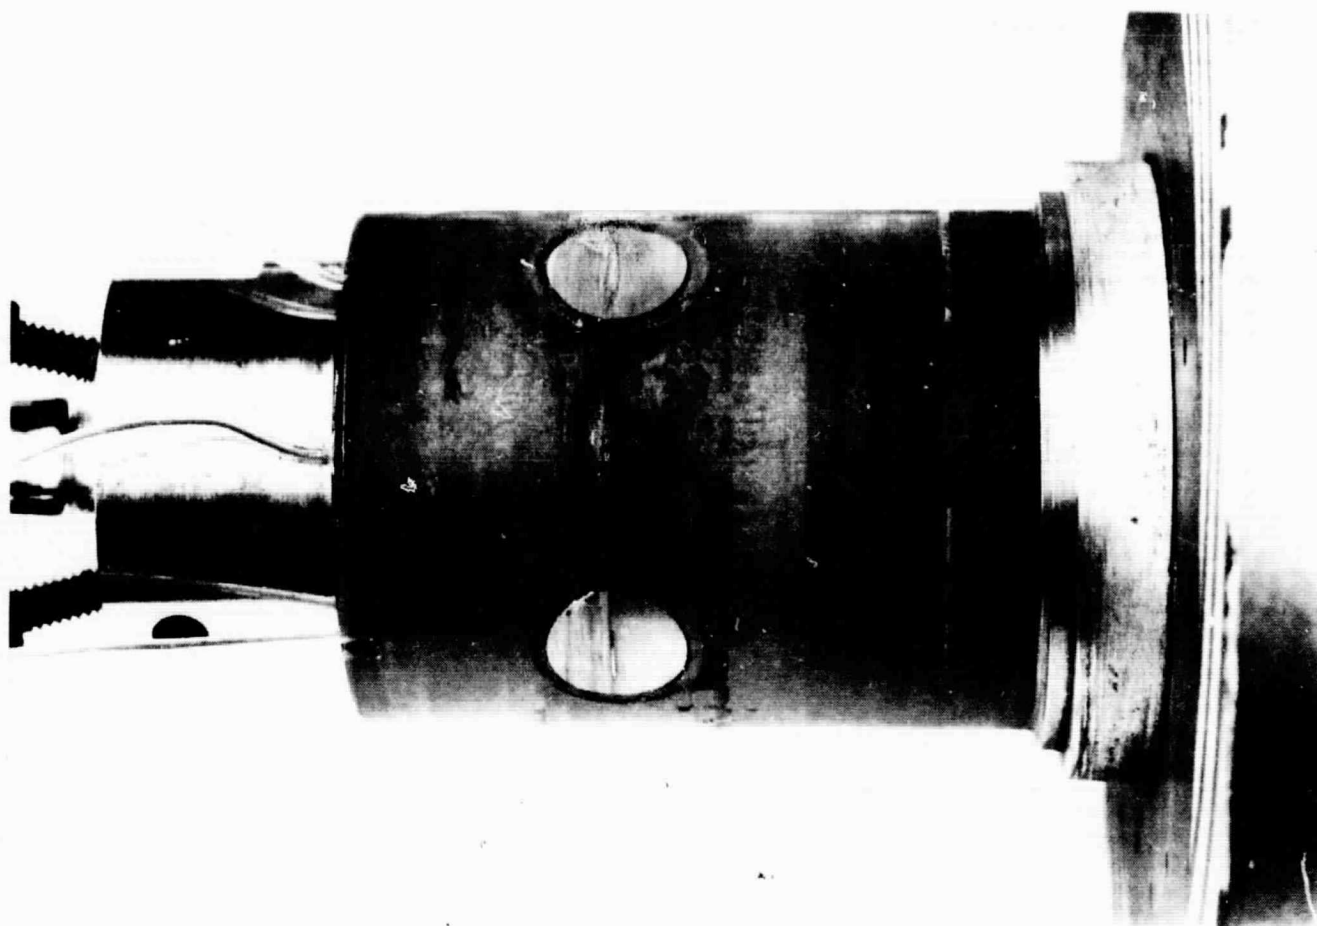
Compressor End (Upper) and Turbine End (Lower)
